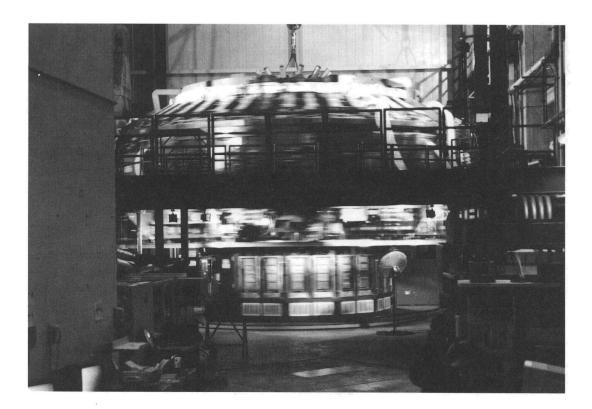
This photo shows the rotating furnace during the casting of the 6.5 meter mirror. The upper section is the actual furnace and the lower section below the turntable holds the corotating electronics and computers which control the temperatures of the heating elements. The ducts at the center of the top intake air to keep the wiring cool. The furnace was rotated at 7.40 rpm for 70 hours by two 40 horsepower DC servomotors. The average speed was controlled to 0.1%. One of these motors was operated from normal AC line power, while the other was operated from diesel generator backup power to assure that spinning would continue in the event of a power failure. UA photo by Lori Stiles
